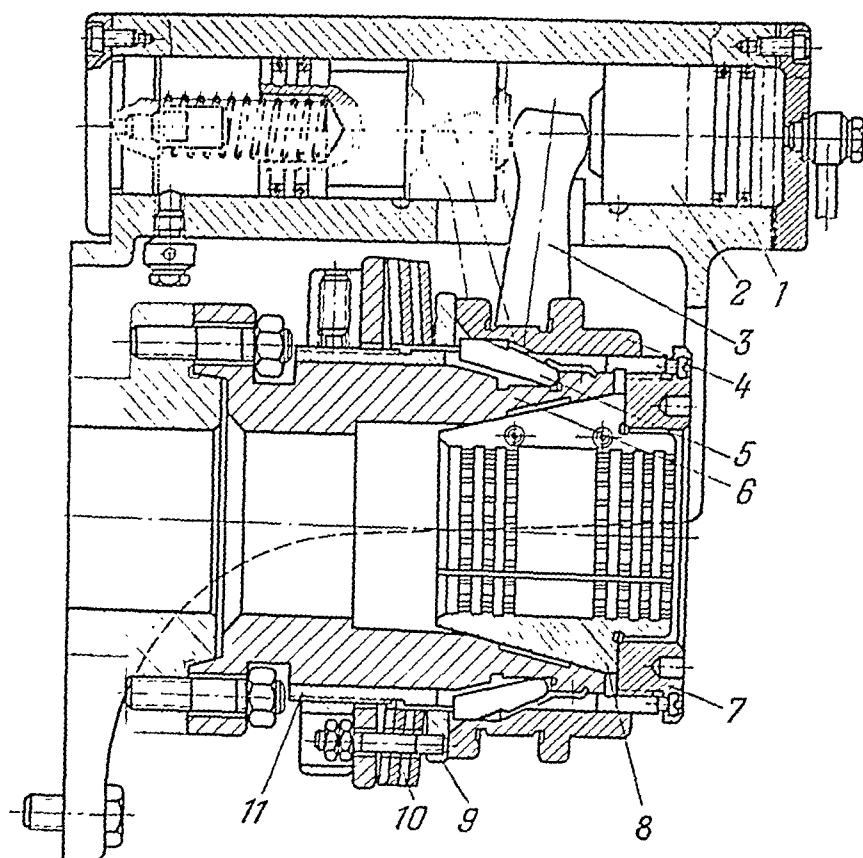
Bar clamping mechanism of the model 1365 turret lathe
